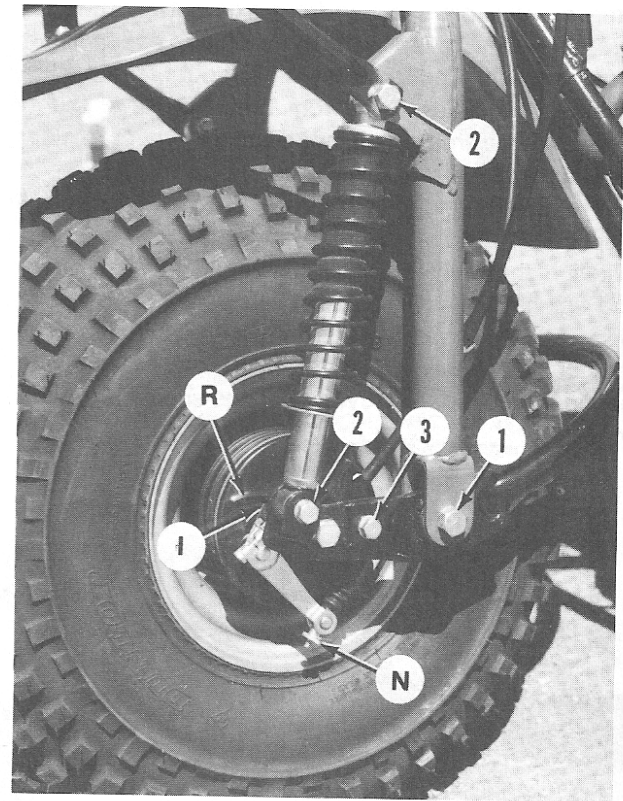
Front brake is adjusted by rotating adjuster nut (N). Renew brake shoes if wear indicator (I) rotates beyond "USABLE RANGE" area (R). Refer to text for suspension fastener tightening torques on models so equipped.
